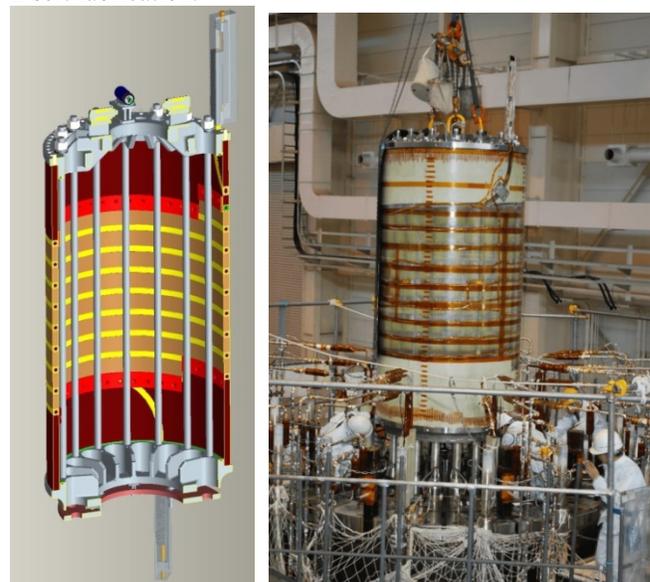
CSI cross section (left) and installation of the CSI into the test facility (right)
